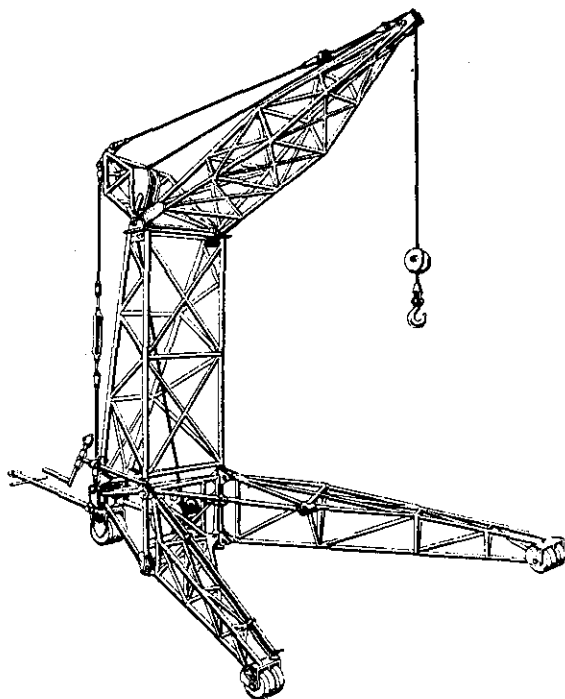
Hoist and frame assembly used for engine removal.
